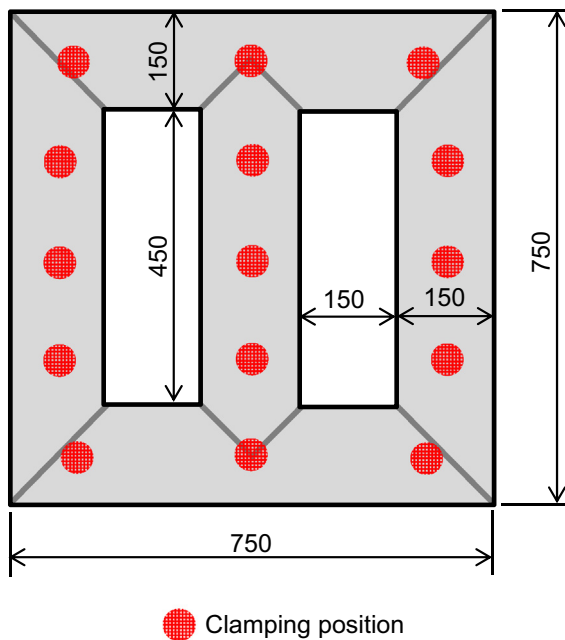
Dimensions of the model core and clamping positions for c-clamps.
